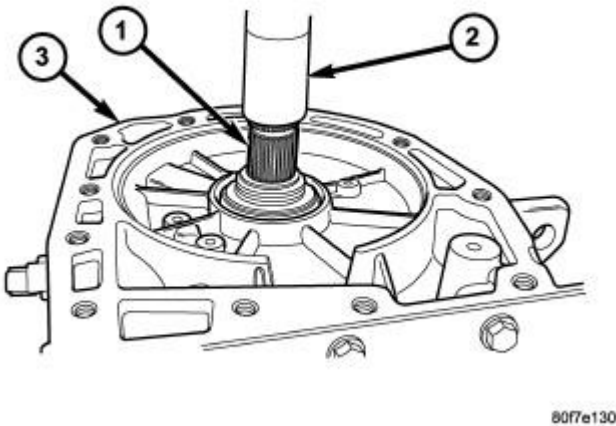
Use Arbor Press to Remove Output Shaft from Case
